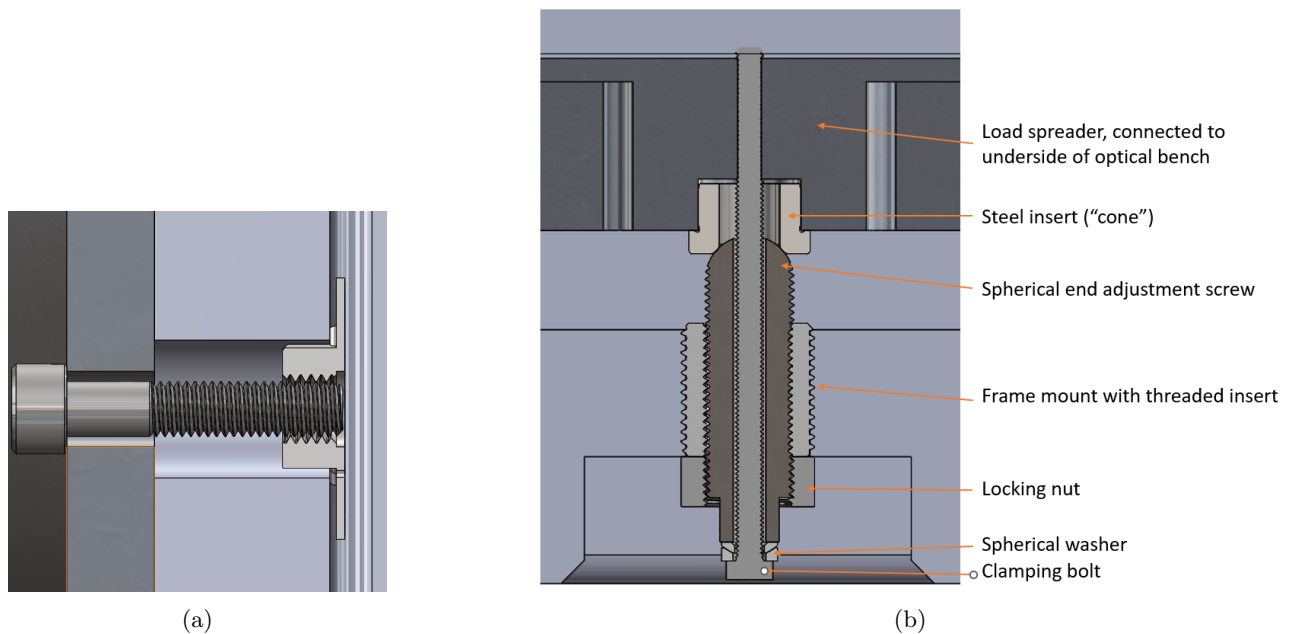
a: Section view showing the structural foam plate sandwiched between the Aluminum front plate and adhesive mount nut. b: Section view showing one of the adjustment and mounting points between the support frame and optical bench.
